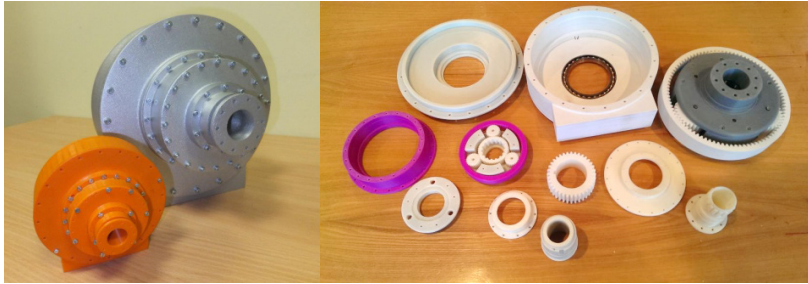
Experimental WT planetary gear unit prototypes and their elements.
